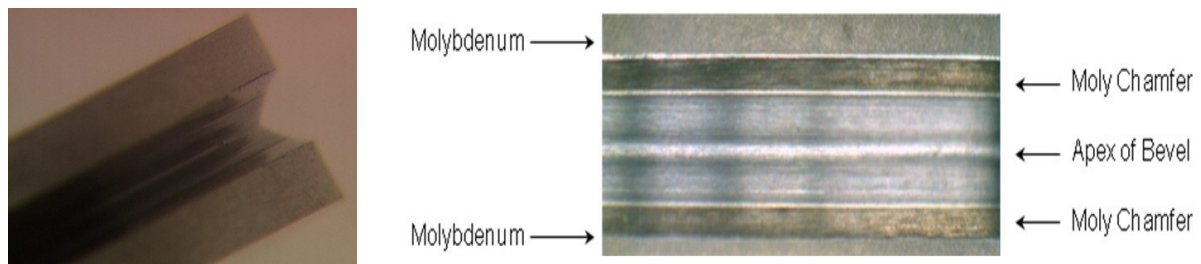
Typical bonded double-positive bevel profile and surface finish after edge grinding
